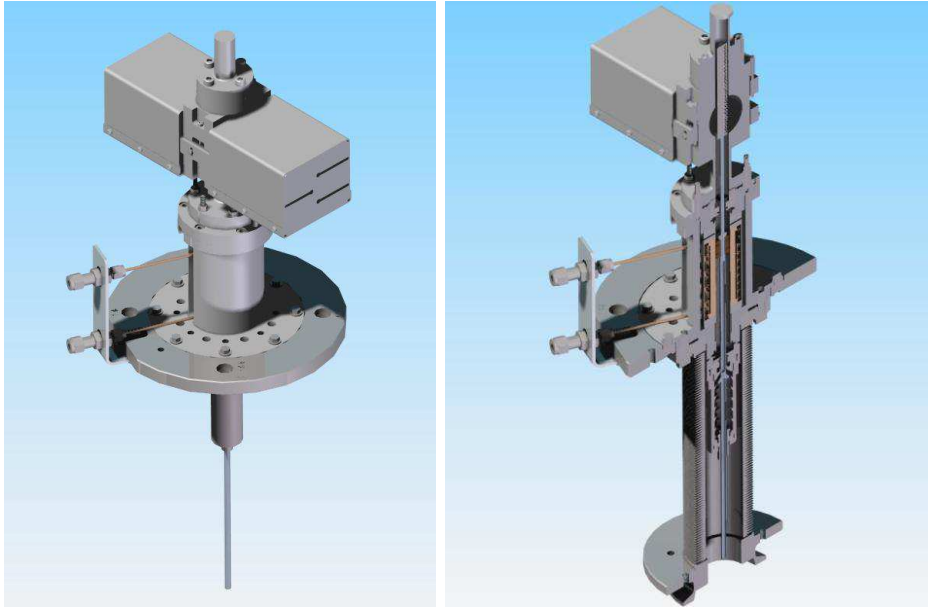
MICE target assembly, (left) with bellows removed, (right) a cutaway view (Descriptions and information on the components in the assemblies shown here follows.)
